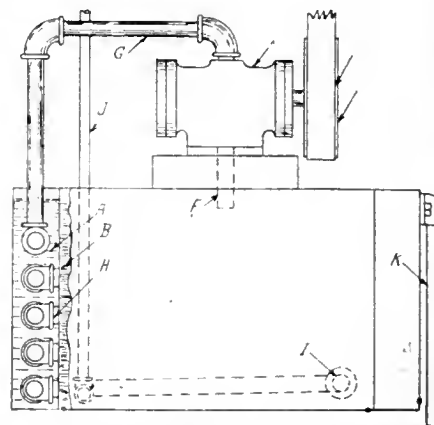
ARRANGEMENT OF CIRCULATING PUMP AND COILS IN QUENCHING TANK
